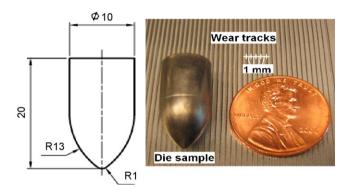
Die sample dimensions and its actual photo on wear tracks.
